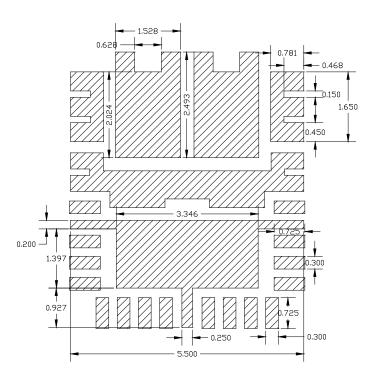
SMD Pad Sizes Detail 1 (Dimensions in mm)
